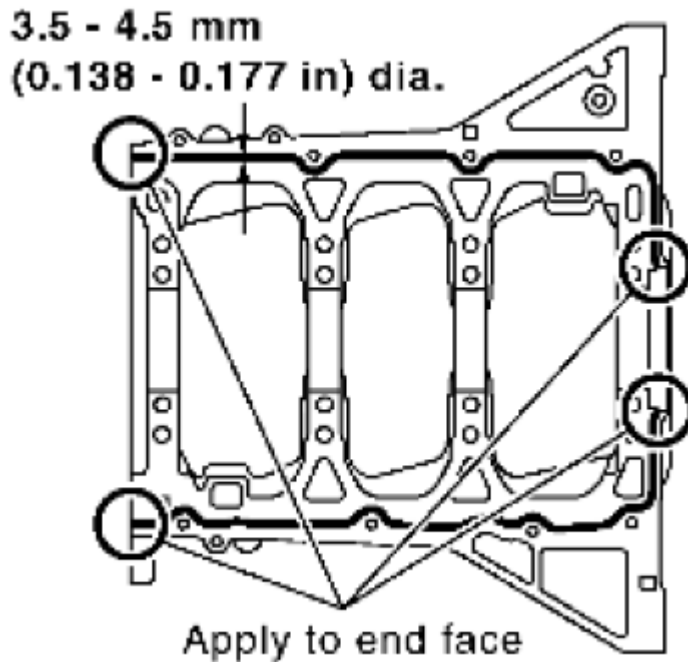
Applying Continuous Bead Of Liquid Gasket Using Tool To Lower Cylinder Block
